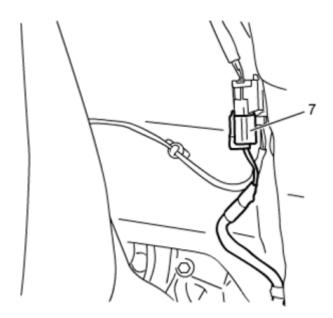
Identifying Front Height Sensor Connector Courtesy of SUZUKI OF AMERICA CORP.
